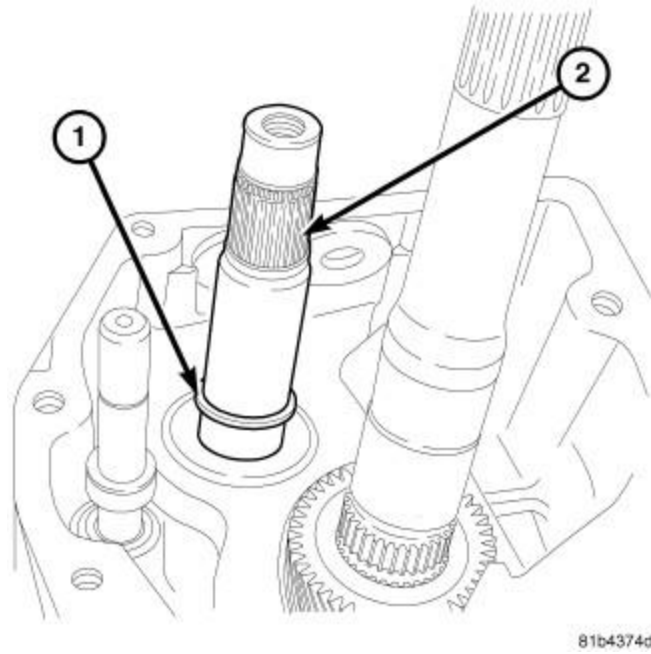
6th Gear Bearing Spacer & Countershaft
